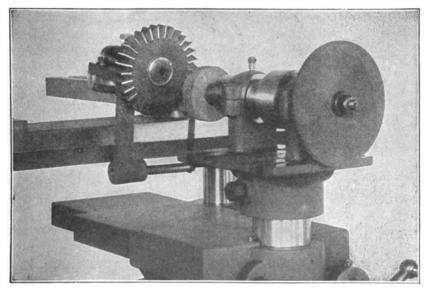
Sharpening side teeth of side milling cutter with a cup wheel.
